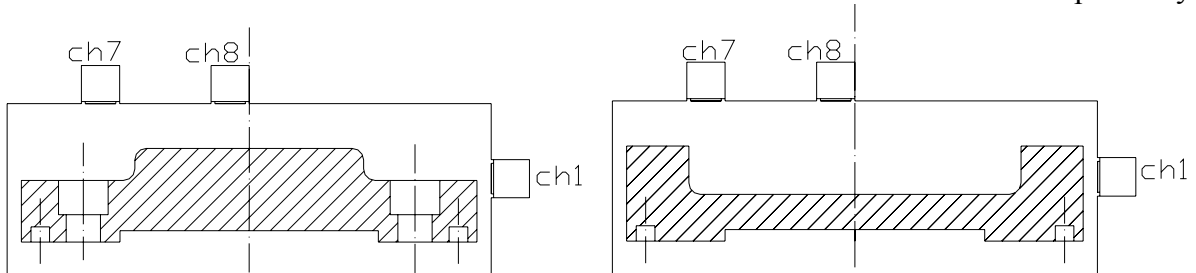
Drawings of the two additional combustion chambers tested. The hill shaped piston to the left and the bowl shaped piston to the right.
